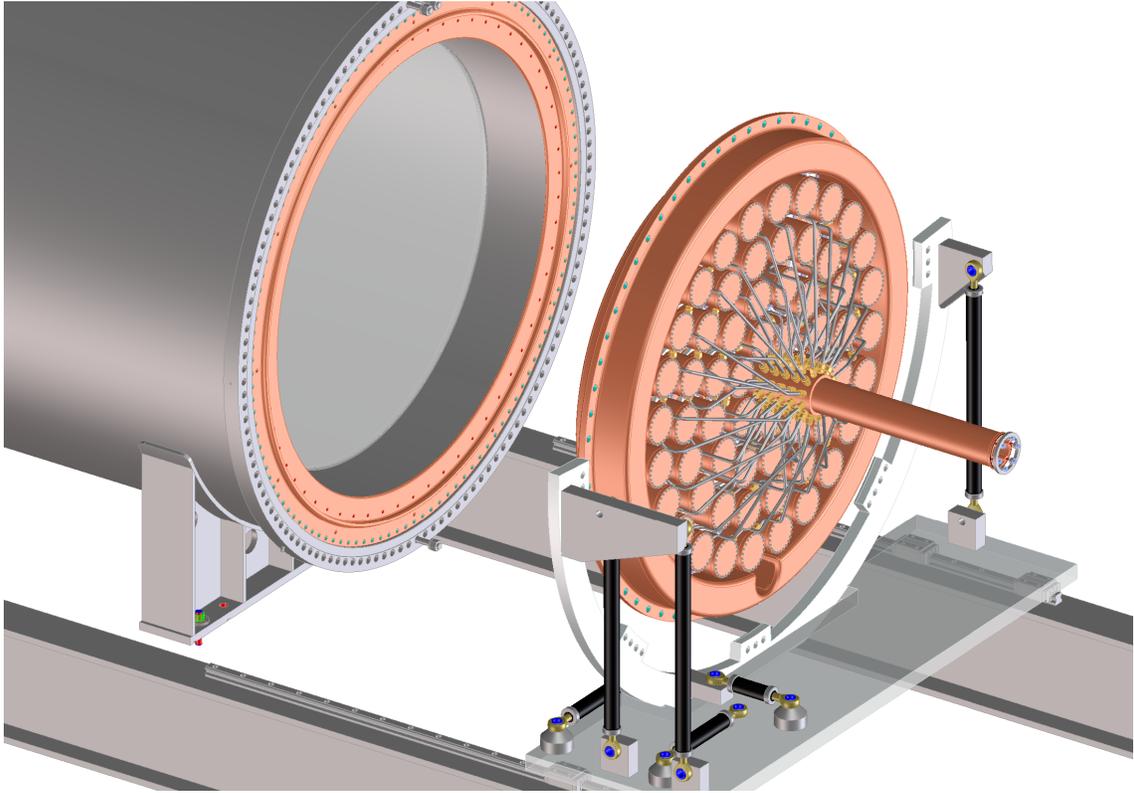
Hexapod Support Fixture, Attached to Carrier Plate
